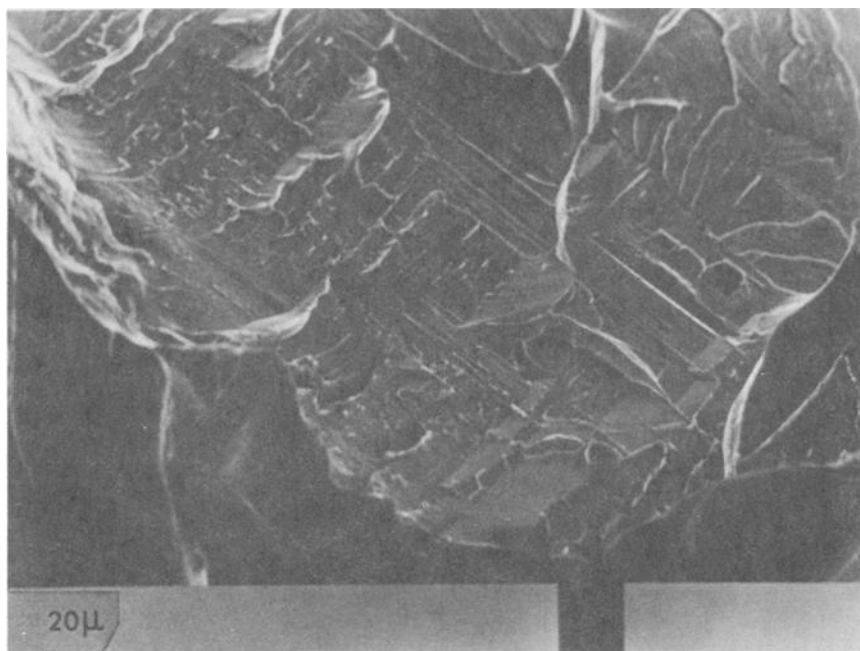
Brittle fracture surfaces from impact tests. Transgranular cleavage fracture. Note crystallographic nature of cleavage facets. Steel A—as received.
